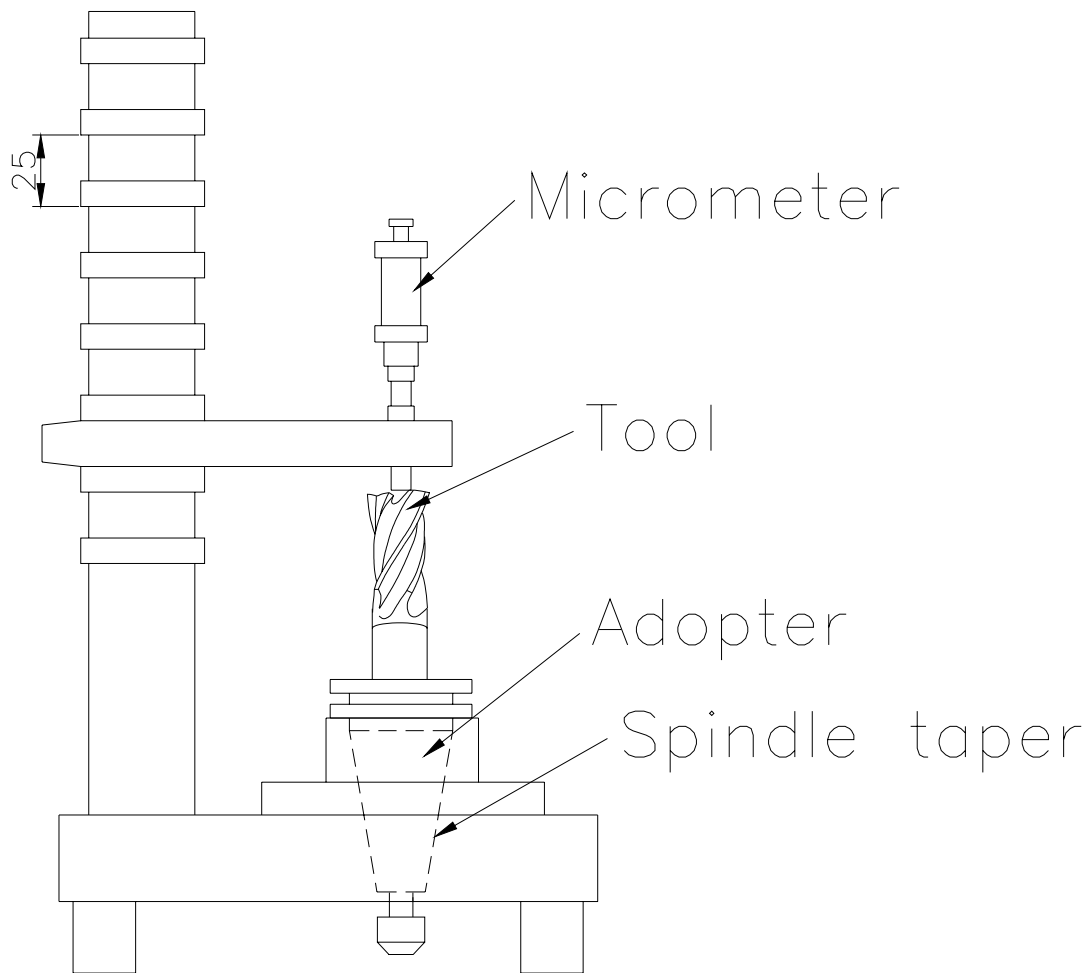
Typical tool setting system useful for machining centre tooling.
